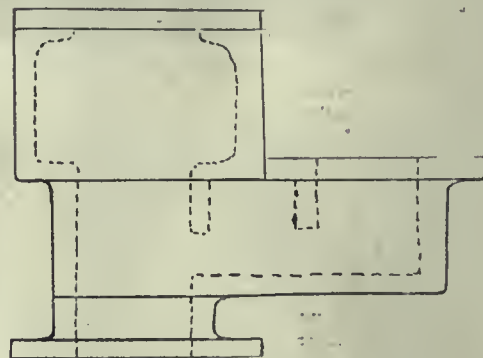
SHOWS STOP VALVE BOX WELL CUT AWAY TO RECEIVE FLANGE.
